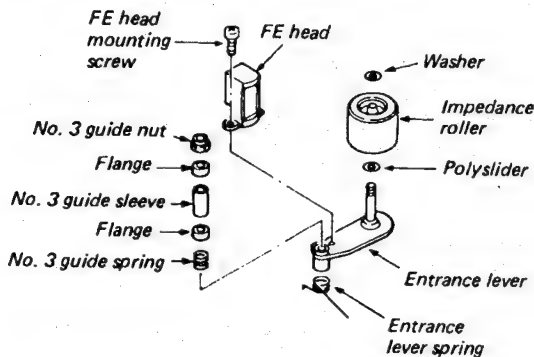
Replacement of No. 3 guide and FE head
